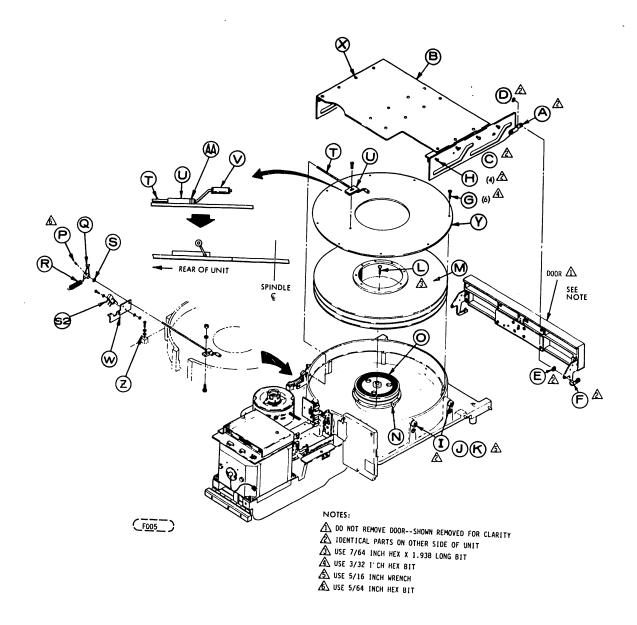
REMOVAL OF RECEIVER PLATE ASSEMBLY AND FIXED DISK PACK
